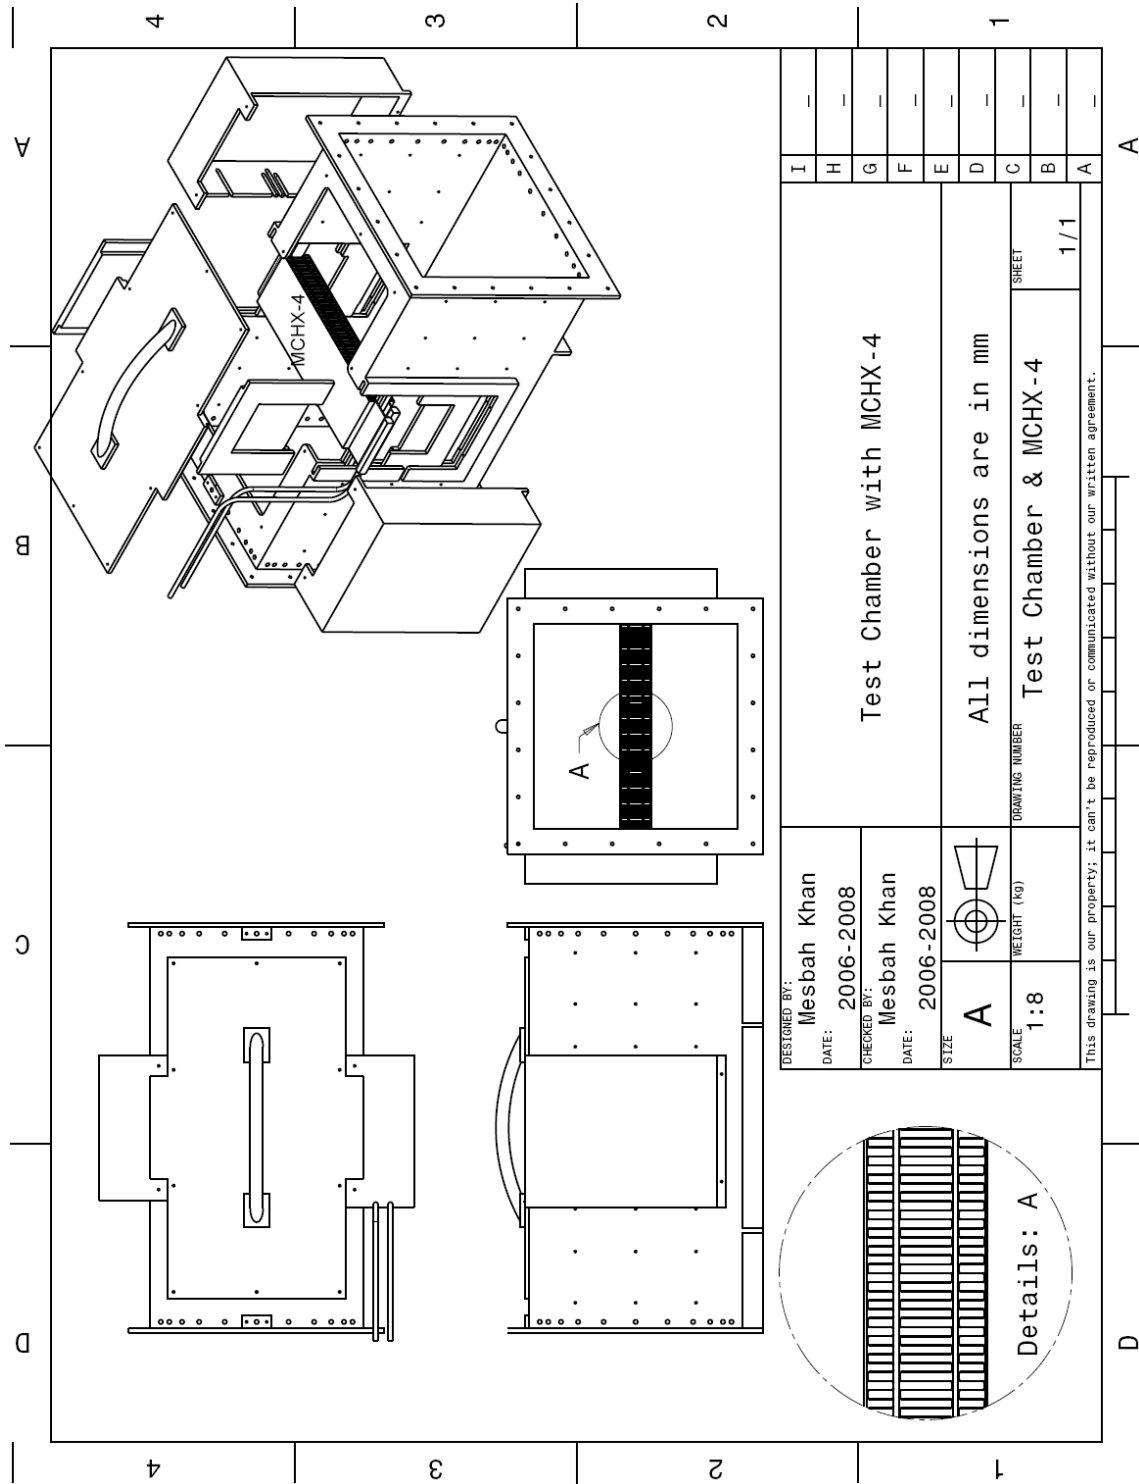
Design of test chamber support structures for test specimens MCHX-4
